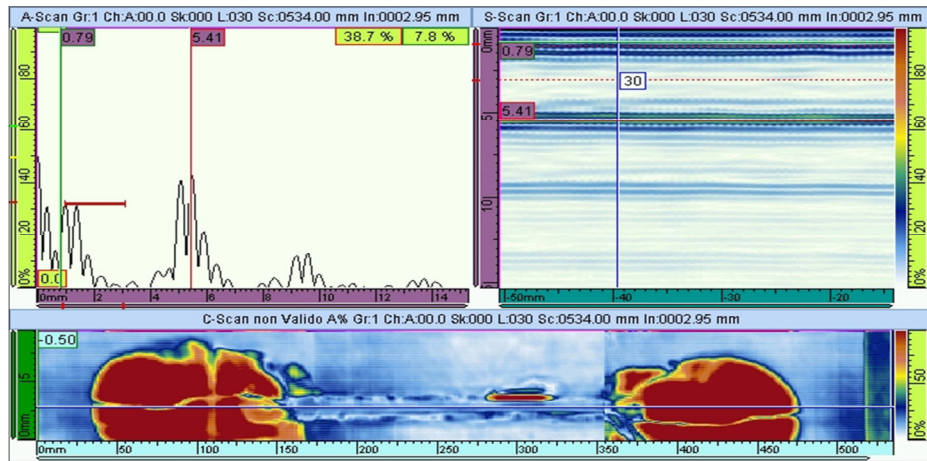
C-scan inspection over the multi-stringer component' surface on damaged zone along the artificial cut.
